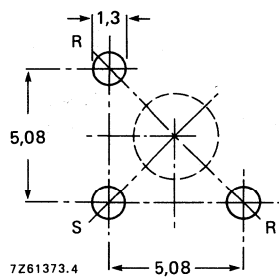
Hole pattern; R=rotor, S=stator. The large hole is for bottom adjustment; the diameter is determined by user's requirements.
